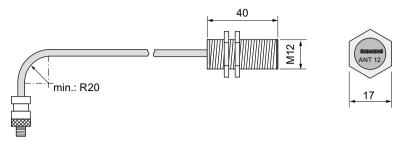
Dimension drawing ANT 12 (all values in mm)
